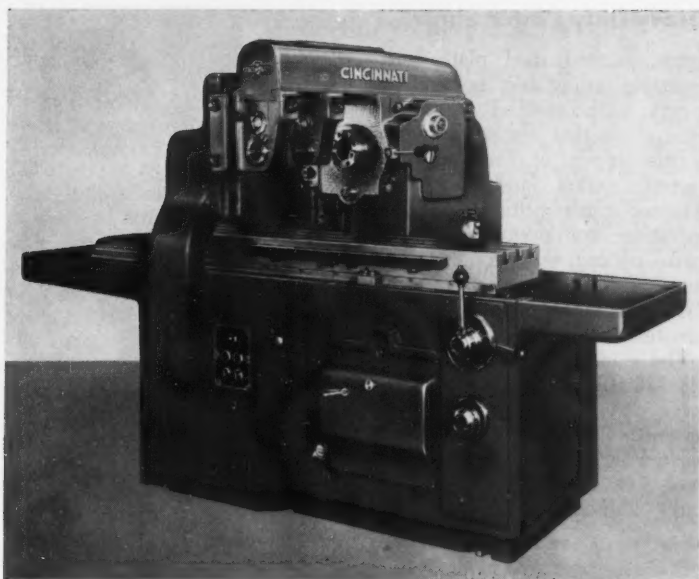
Plain rise-and-fall style "Powermatic" milling machine
